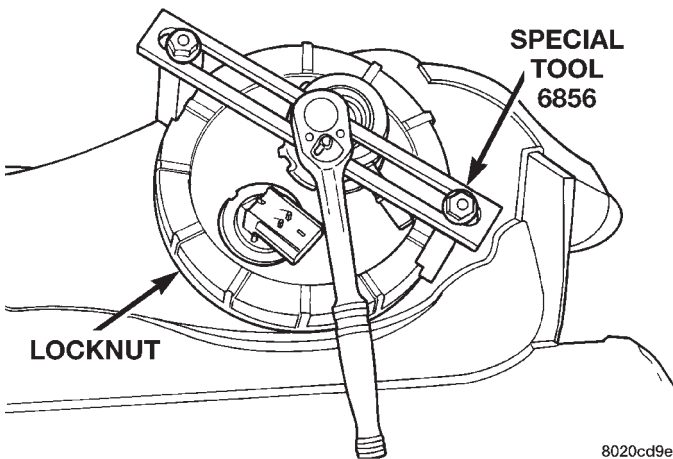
Locknut Removal/Installation—TYPICAL MODULE
